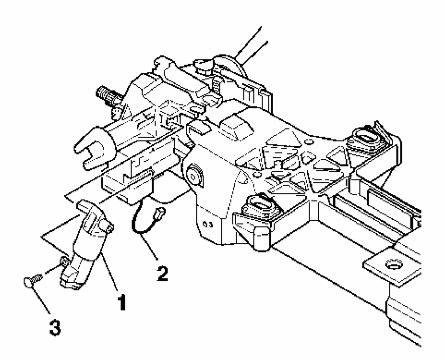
View Of Theft Deterrent Lock, Black Connector & Screw Courtesy of GENERAL MOTORS CORP.
